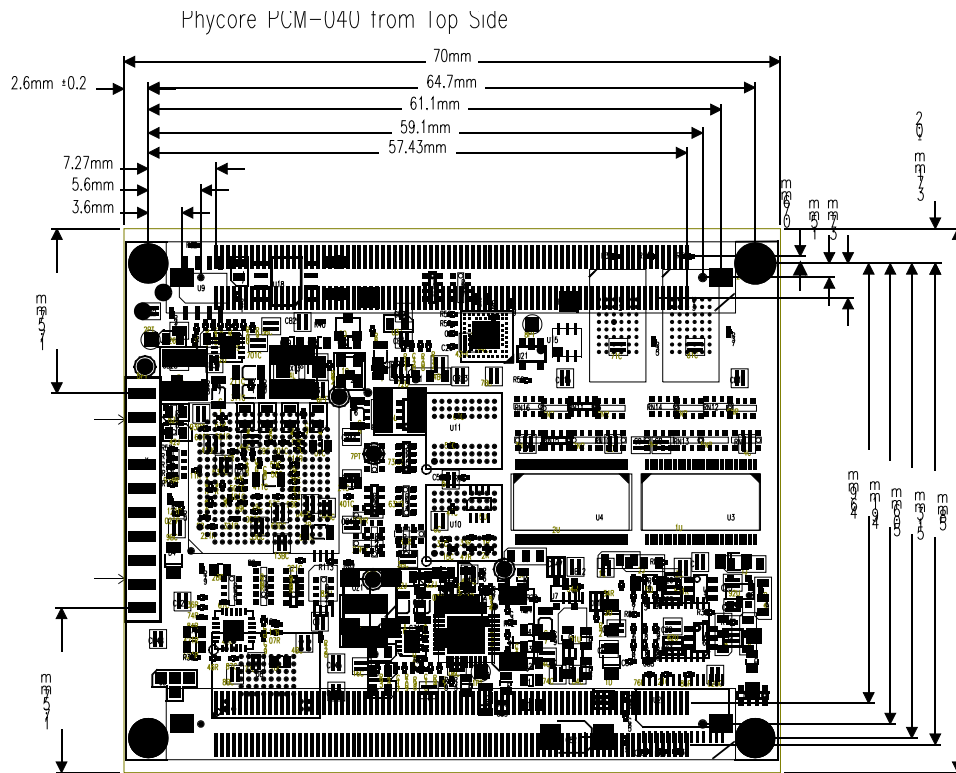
phyCORE-LPC3250 Physical Dimensions
